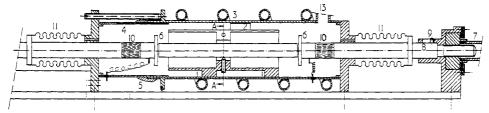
(a). Outline of the mechanical construction. 1, cams; 2, springs; 3, outer brass tube; 4, inner brass tube; 5, elastic putty; 6, electrodes; 7, driving tube; 8, electrode rod; 9, pin; 10, insulating blocks; 11, bellows; 13, vacuum connection.
